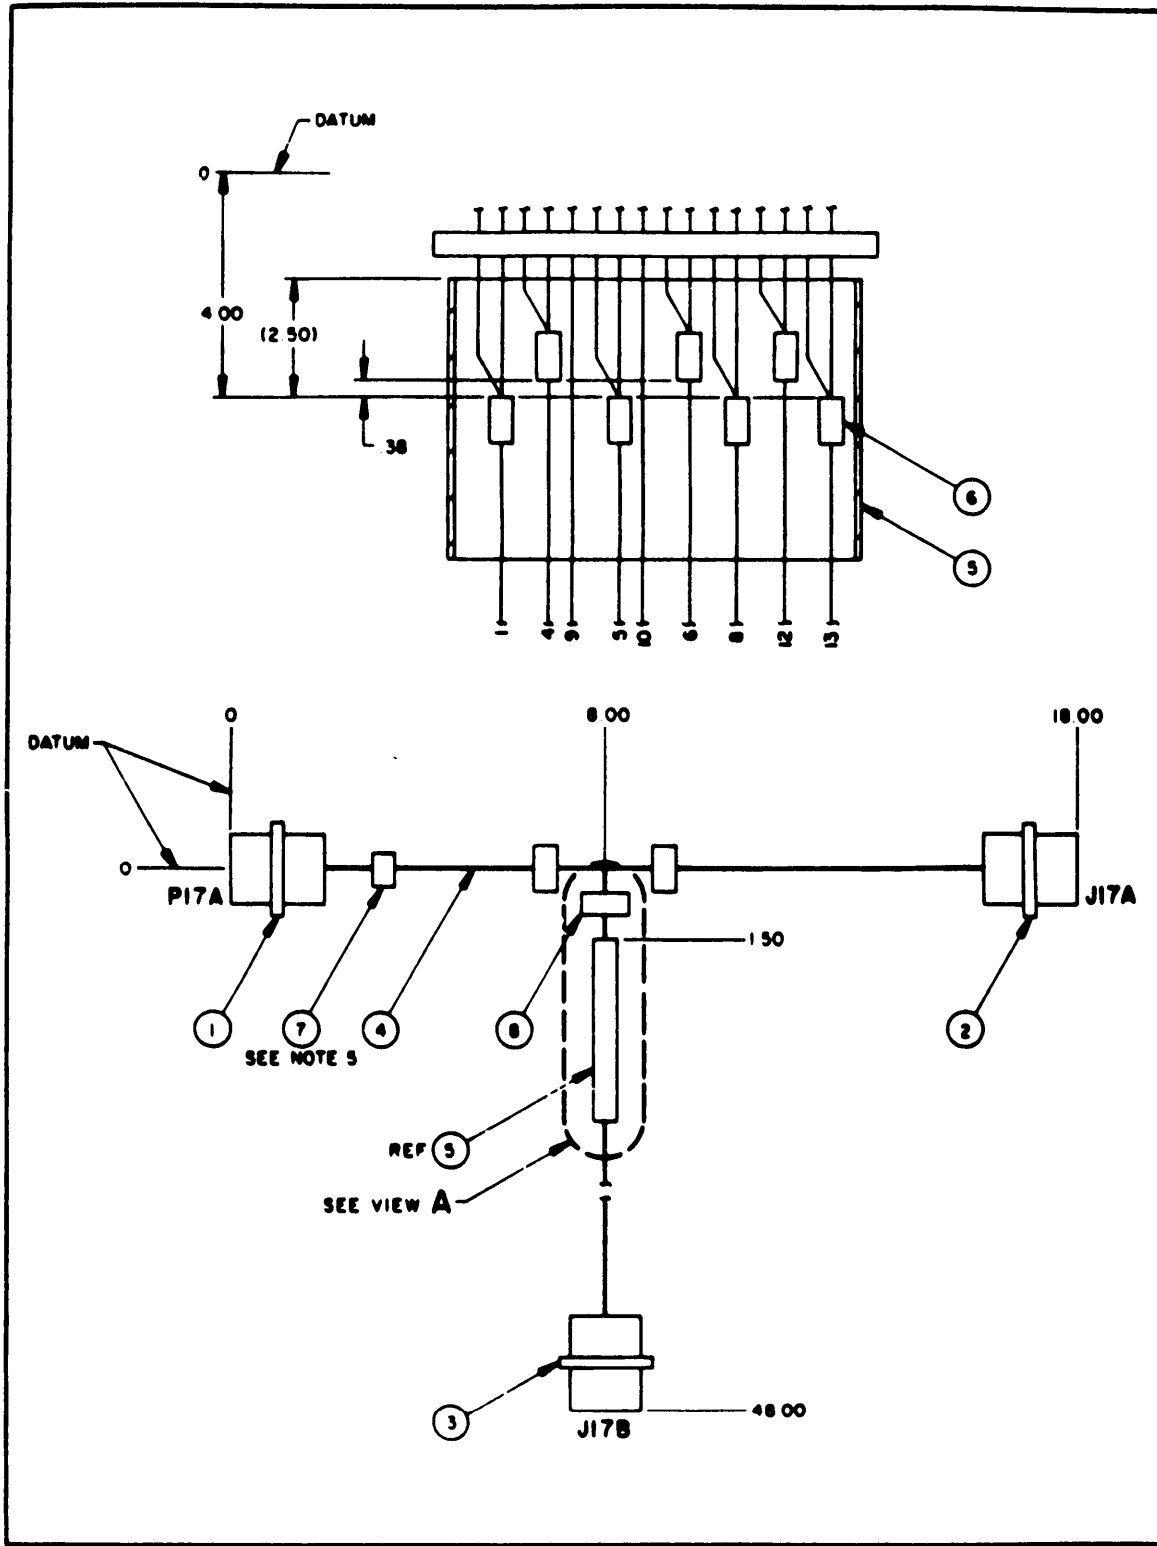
Breakout Cable (Sheet 1 of 2)
